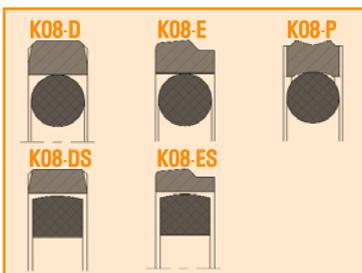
Examples of co-axial and in-line composite seals for piston sealing
